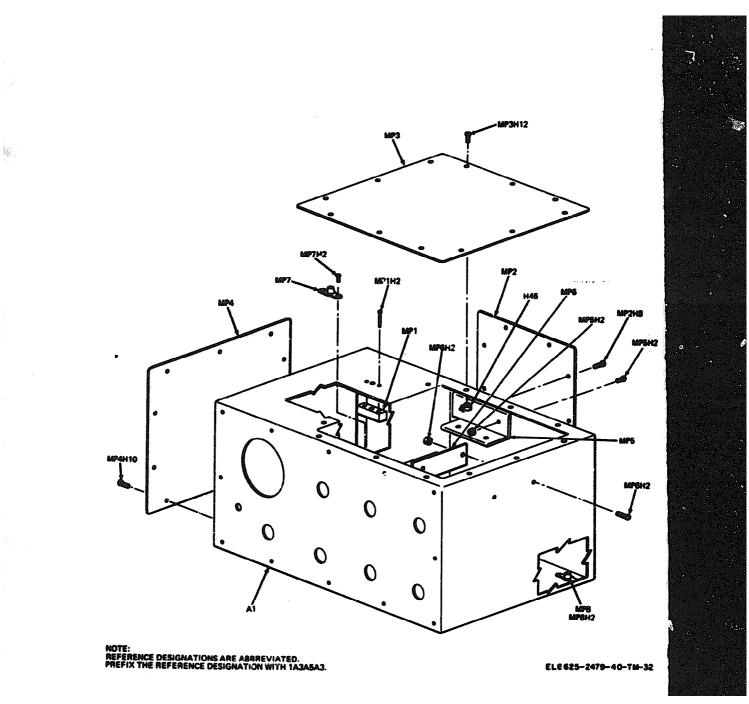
Monitor box assembly 1A3A5A3, parts location.
